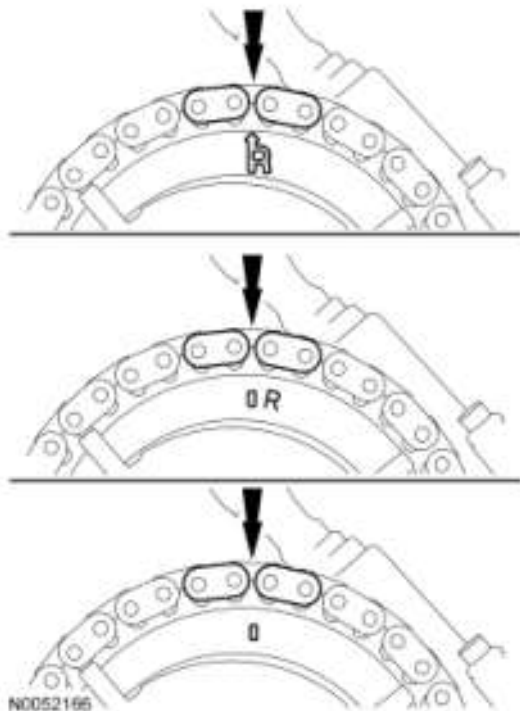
Positioning RH Timing Chain On Camshaft Sprocket
